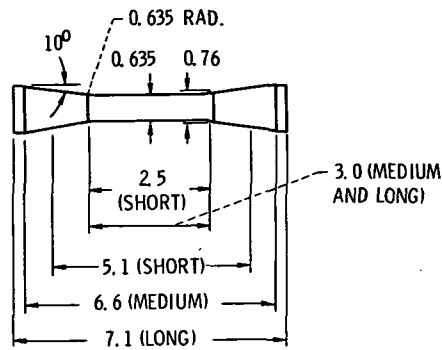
Taper-headed specimen. (Dimensions are in cm.)
